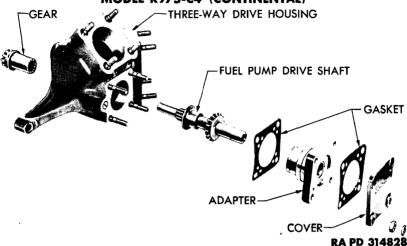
Three-way Drive Housing Assembly — Disassembled
